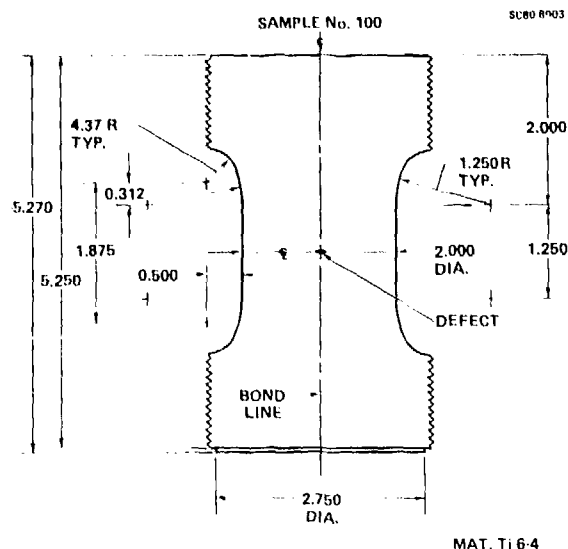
Sample 100: Tensile specimen with interior fatigue crack starter notch.
